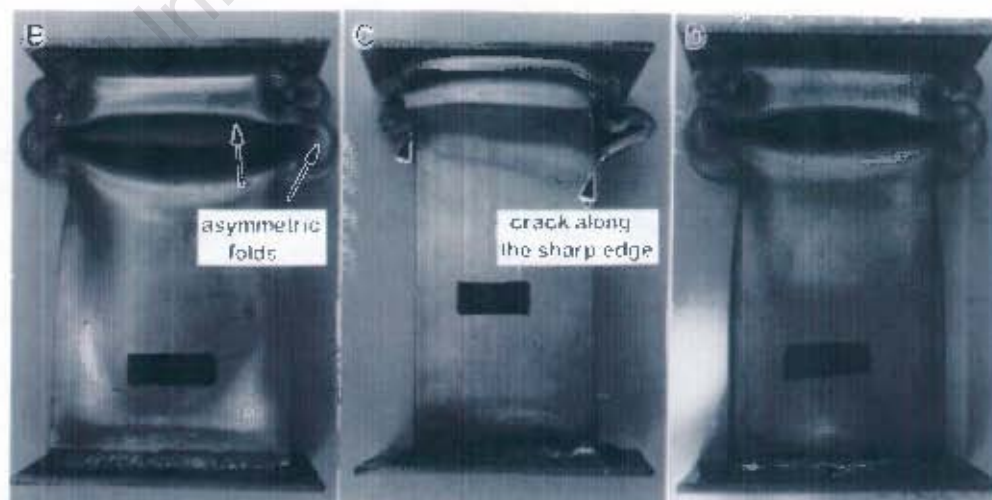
Deformed shaped of extruded aluminium rectangular tube[52].
